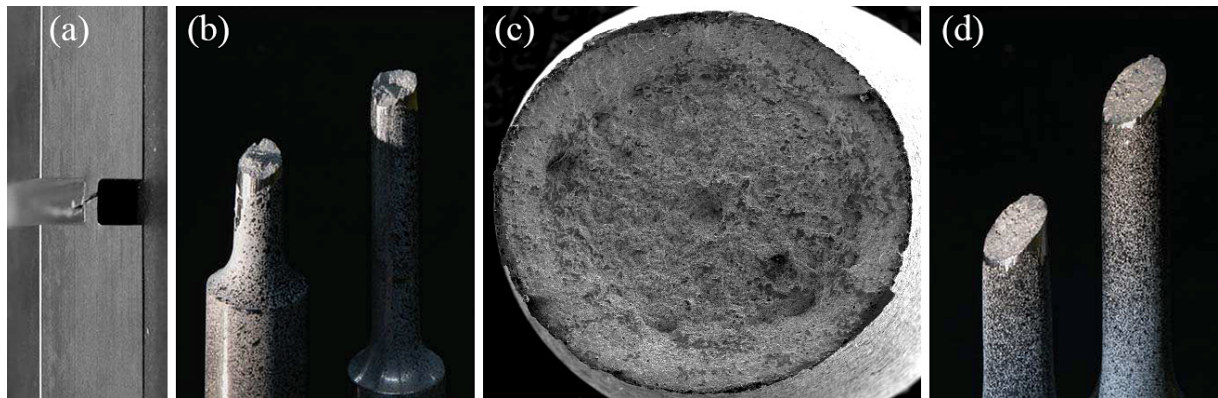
Post-mortem: (a) flat specimen of aluminium alloy 2024-T351 [24]; (b) smooth cylindrical specimen of aluminium alloy 2024-T351 with 6 mm in diameter [24]; (c) smooth cylindrical specimen of AISI 1045 carbon steel [25]; (d) smooth cylindrical specimen of aluminium alloy 2024-T351 with 9 mm in diameter [24].
